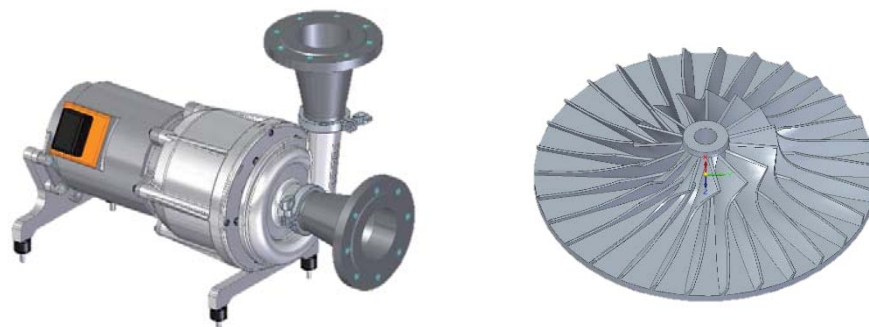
Design of a high speed turbo compressor prototype by Rotrex, along with the 14.6 cm impeller
